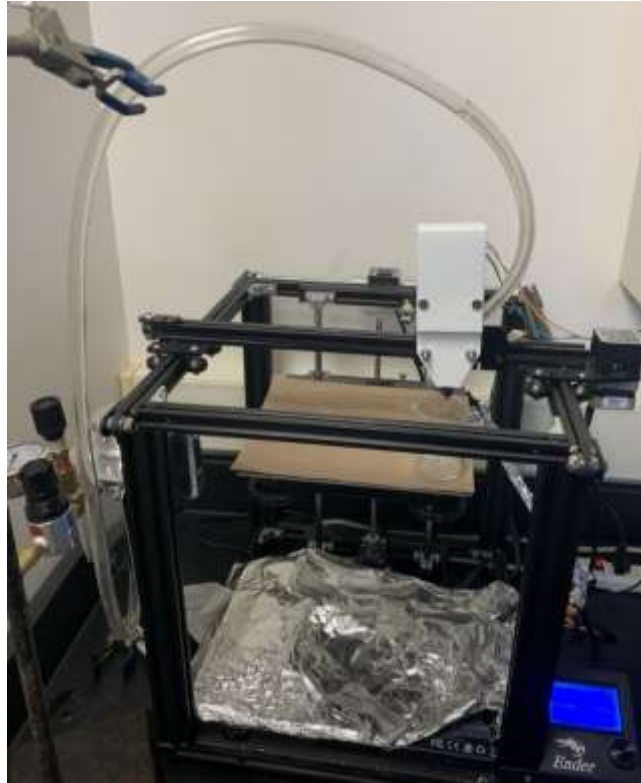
Custom Ender 5 DIW printhead and printer setup.
